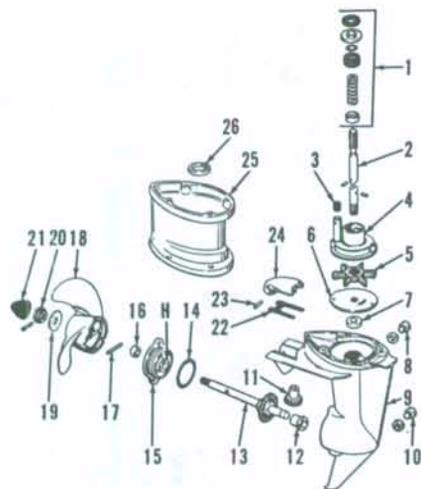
Exploded view of lower unit gearcase, water pump and associated parts used on 5 hp models.
